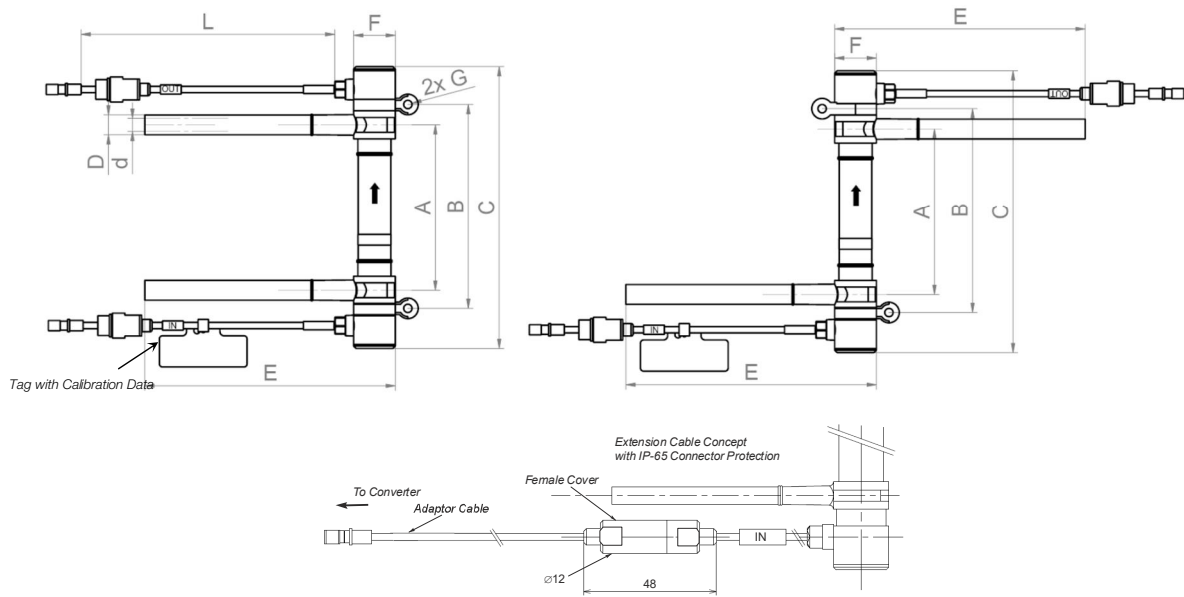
Dimension legend for LFS-04 and LFS-08 sensors (left: U-shape, right: Z-shape)
